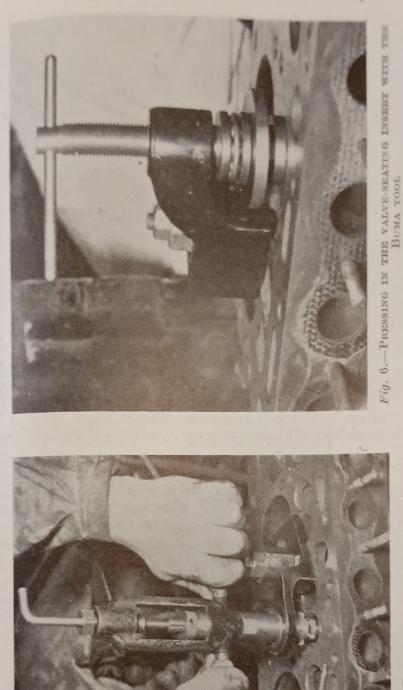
USING THE BUMA VALVE-SEATING INSERT CUTTER
